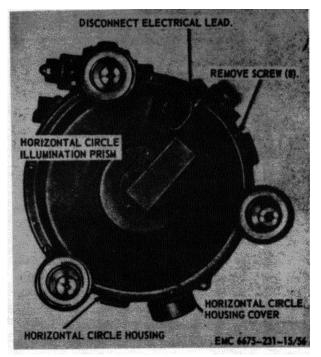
Horizontal circle housing cover and horizontal circle illumination prism, removal and installation.
